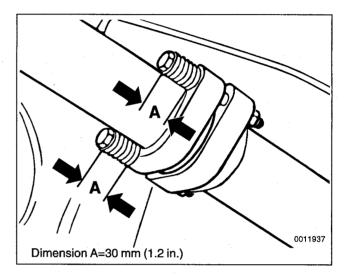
On 4-cylinder engines, tighten nuts evenly so that springs are preloaded to Dimension A.
